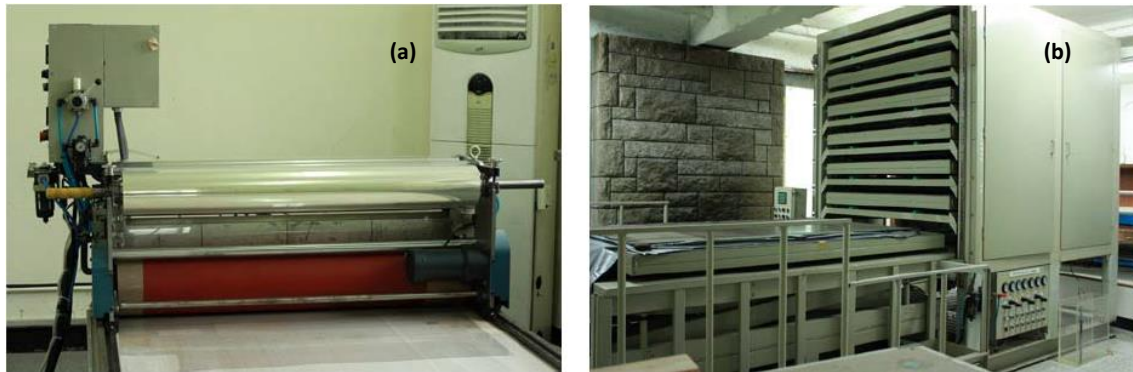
Electrode insulation machine (a) and gap assembly machine (b).
